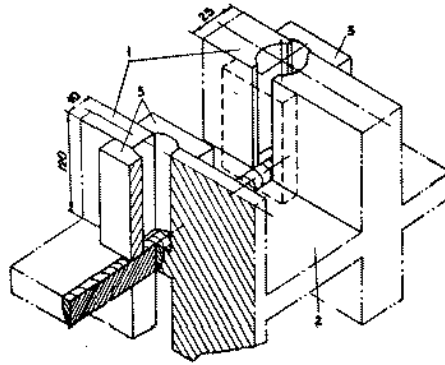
Diagram of the joint groove for welding ribs with 10 mm and 25 mm thickness.
